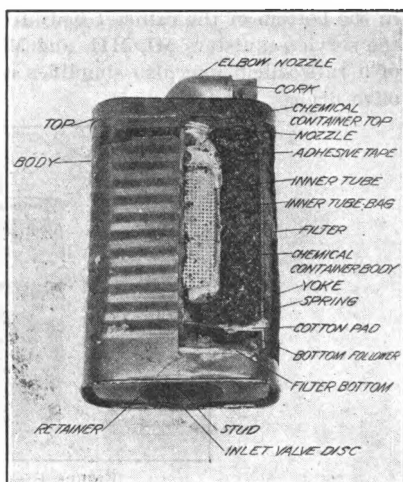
Service canister MIV sectionalized, showing component parts
